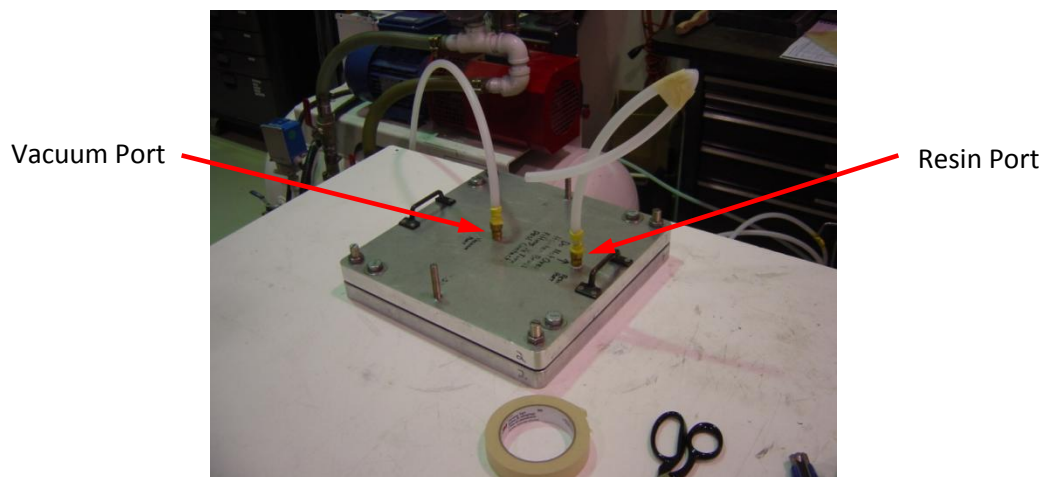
Current method of moulding panels, with mould closed and vacuum applied.
